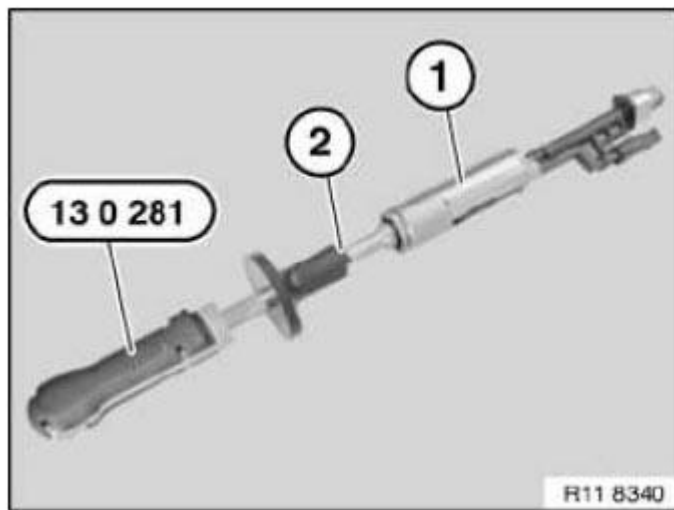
Identifying Solenoid Valve Injectors And Special Tool (13 0 281)
